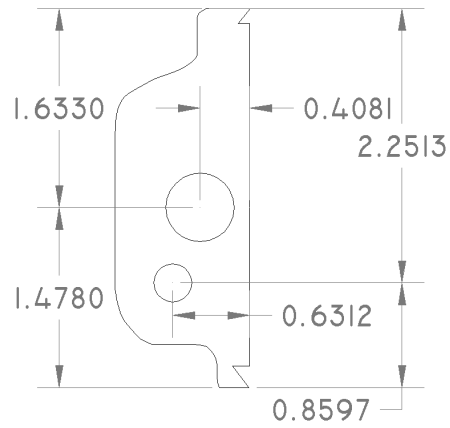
Front spindle shim drawing. Same shim on both sides of the bearing.
